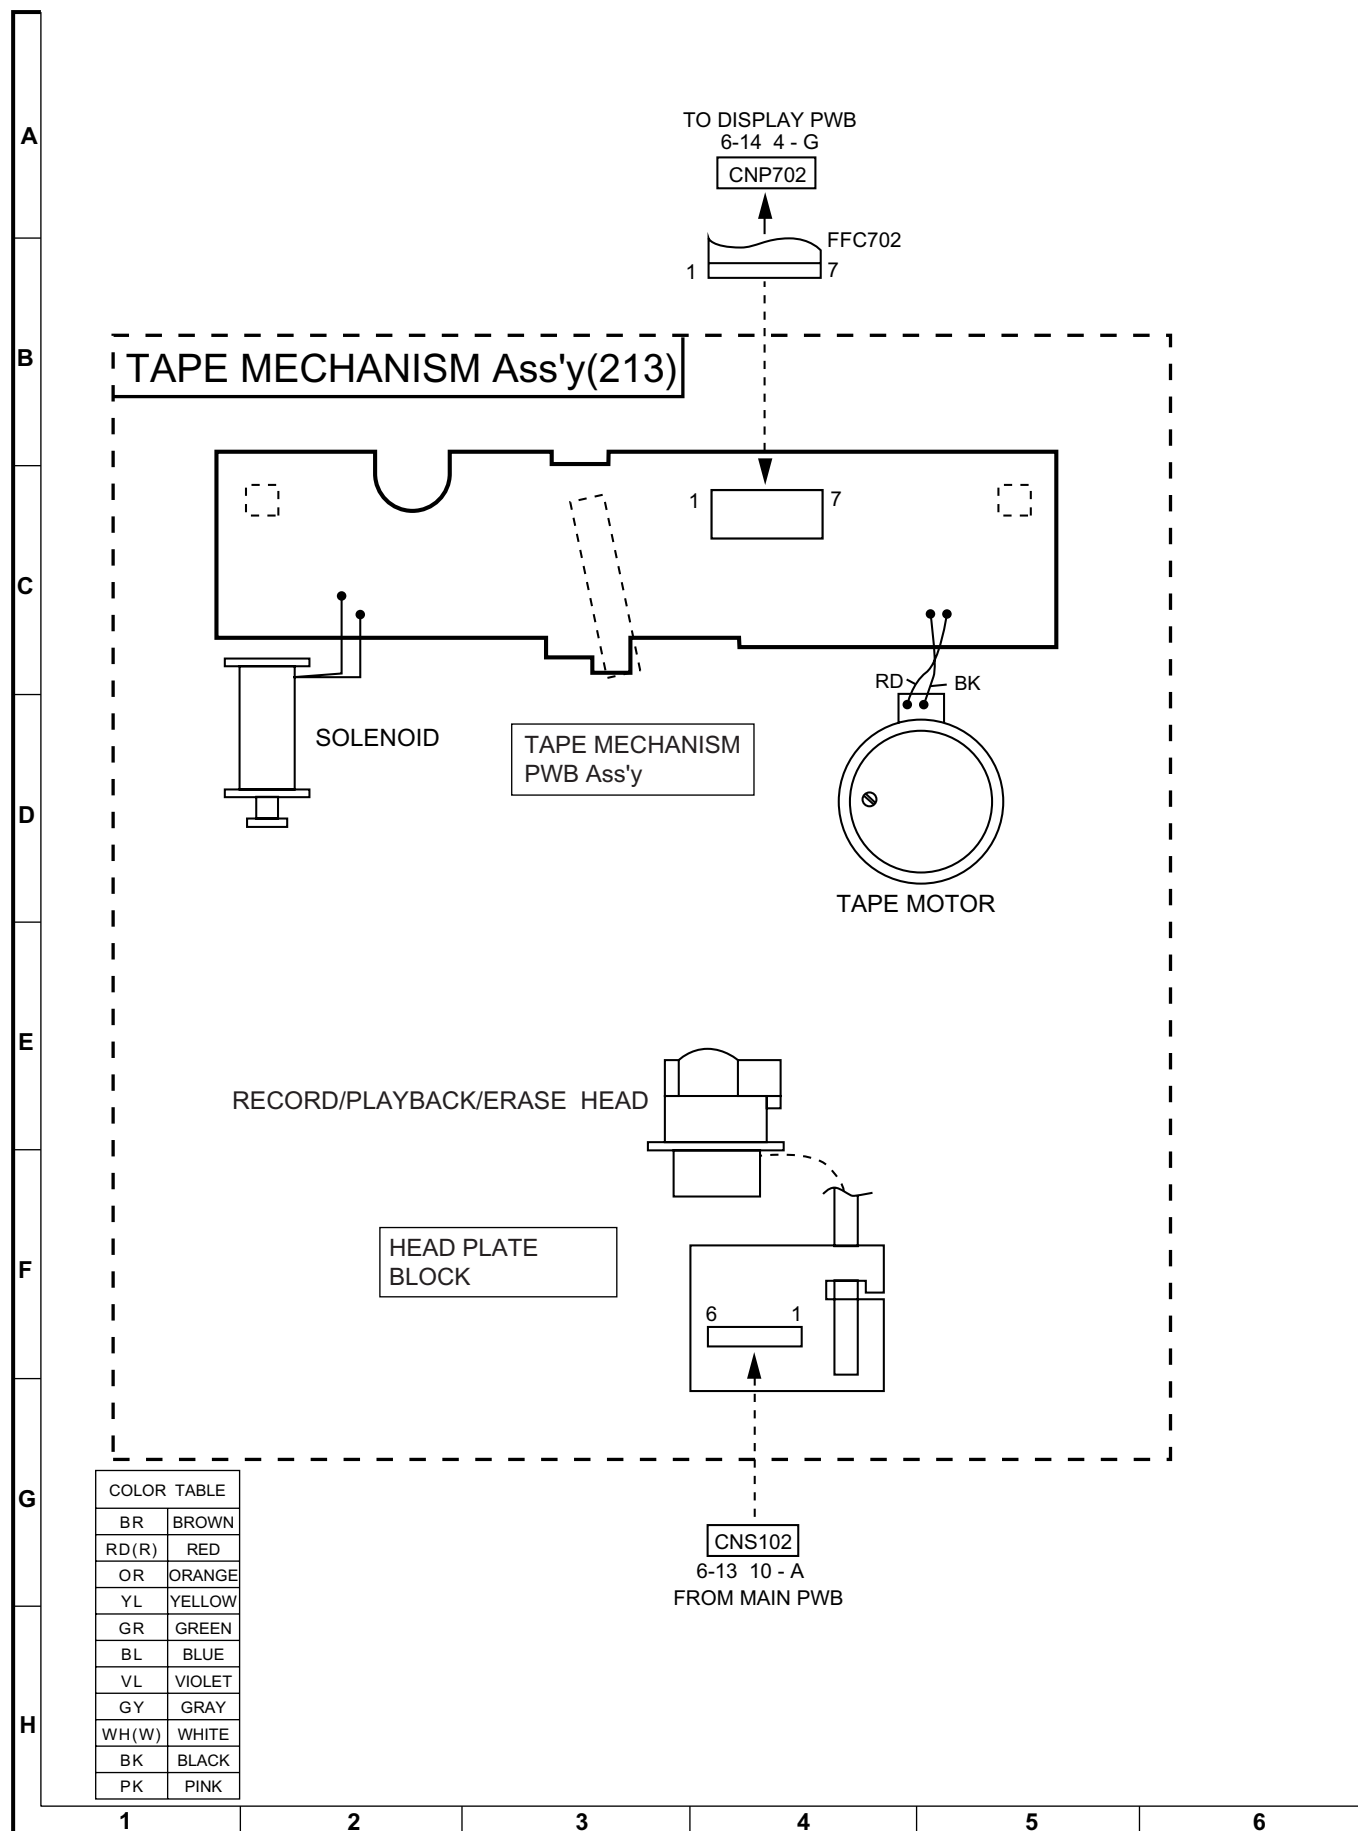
WIRING SIDE OF P.W.BOARD (9/9)
